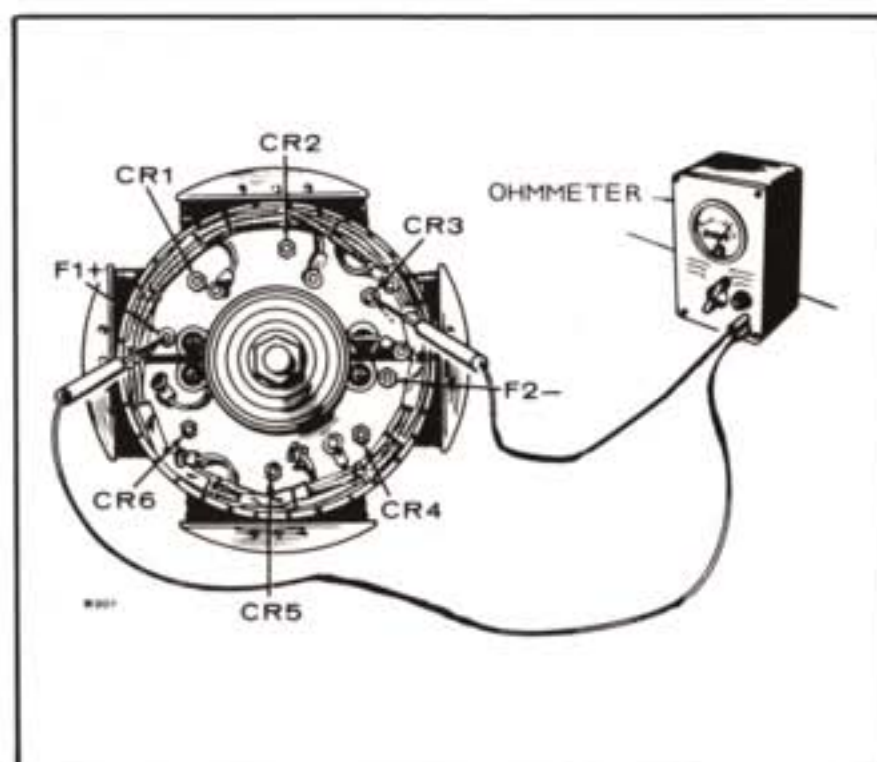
TESTING ROTATING RECTIFIERS
